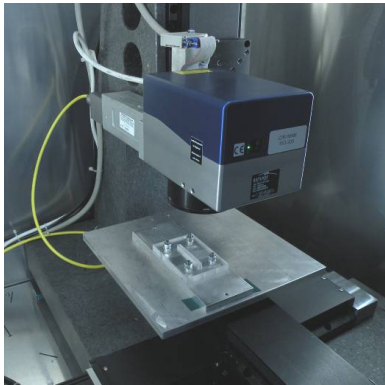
Laser machining equipment (Superscan II-10 by Raylase).
